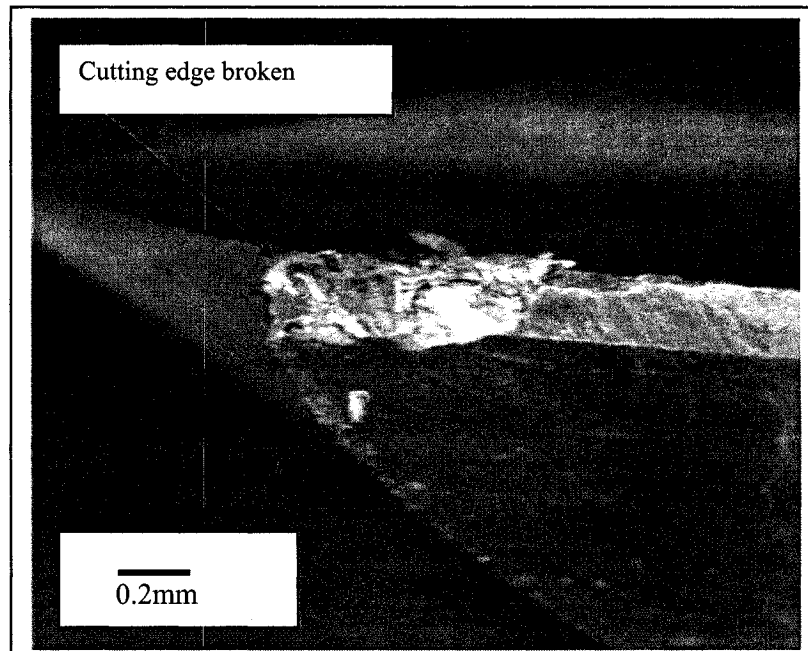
Wear surface, cutting speed= 50 m/min (836 rpm), depth of cut = 2.5 mm, feed = 0.025 mm/tooth, unstable(chatter)
